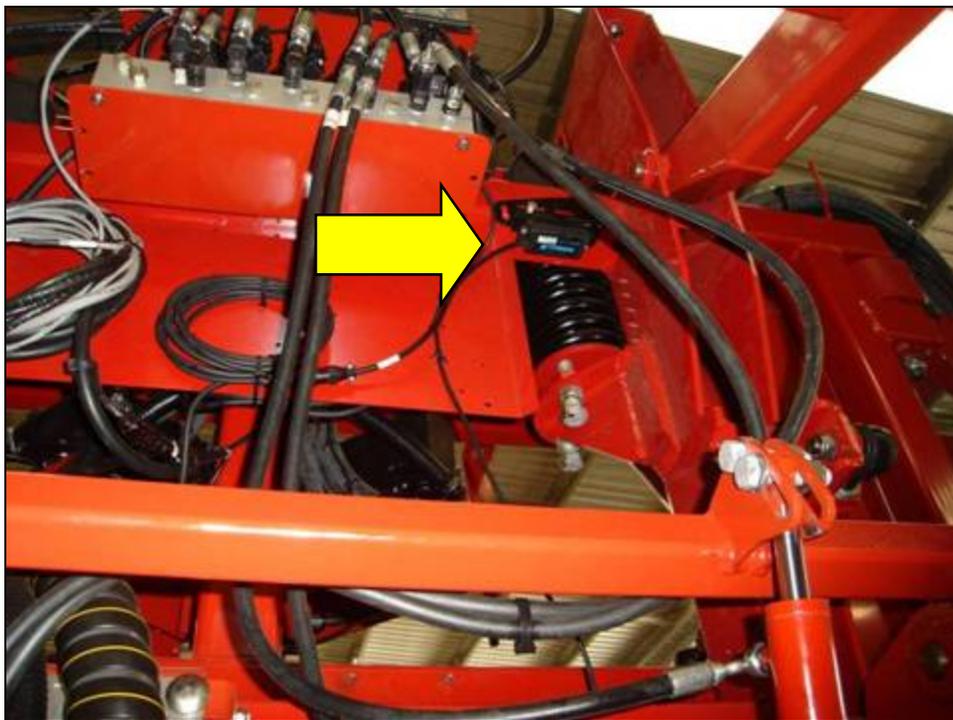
Chassis Roll Sensor Mounting (Viewed from the front of sprayer)
